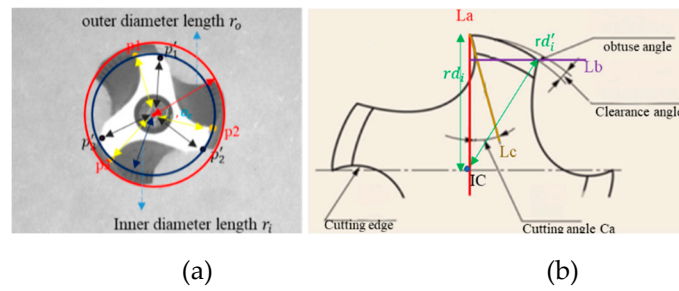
Tap surface detection target; a) Tap placement inspection; b) Tap cutting angle and clearance angle requirements.
